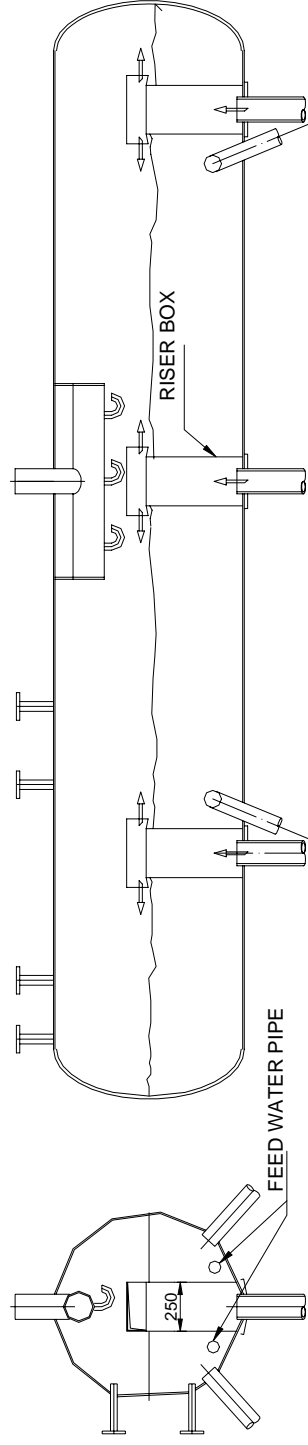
MODIFIED DRUM INTERNAL ARRANGEMENT
